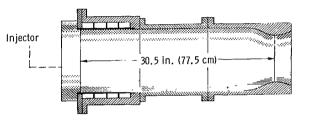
Combustion chamber assembly with liner installed. View looking toward injector. Injector details: 487 elements, fuel - oxidant - fuel with 54 fuel jets for film cooling. Oxidant orifice diameter, 0.035 inch (0.089 cm); fuel orifice diameter, 0.018 inch (0.046 cm); impingement angle, approximately 40°.
